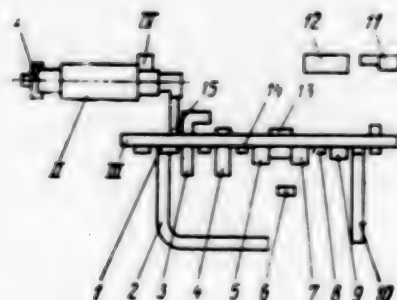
Automatic assembly line: I -- device for loading intermediate products of pistons into furnace; II -- furnace for heating pistons; III -- automatic machine for assembling the connecting rod-piston group; IV -- device for unloading pistons from furnace; 1 -- device for loading pistons; 2 -- connecting rod storage; 3 -- device for insertion of piston pins; 4 -- device for installing stopping rings; 5, 7, 13 -- devices for installing piston rings; 6 -- central control panel, 8, 14 -- monitoring devices; 9 -- mechanism for unscrewing nuts of connecting rod bolts and shift the connecting rod cap; 10 -- storage for assembled products; 11 -- electrical equipment; 12 -- hydraulic station; 15 -- device for orienting pistons.
